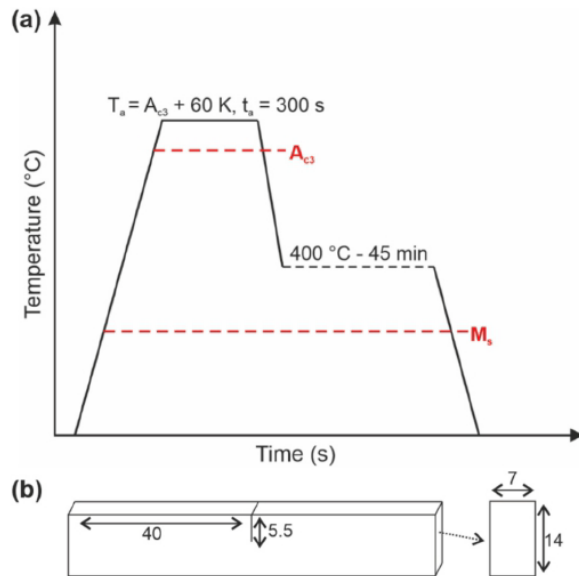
| (a) Graphical representation of heat treatment. (b) Specimen geometry of the single edge notch bend (SENB) specimen. Dimensions are given in mm. [Colour figure can be viewed at wileyonlinelibrary.com]
